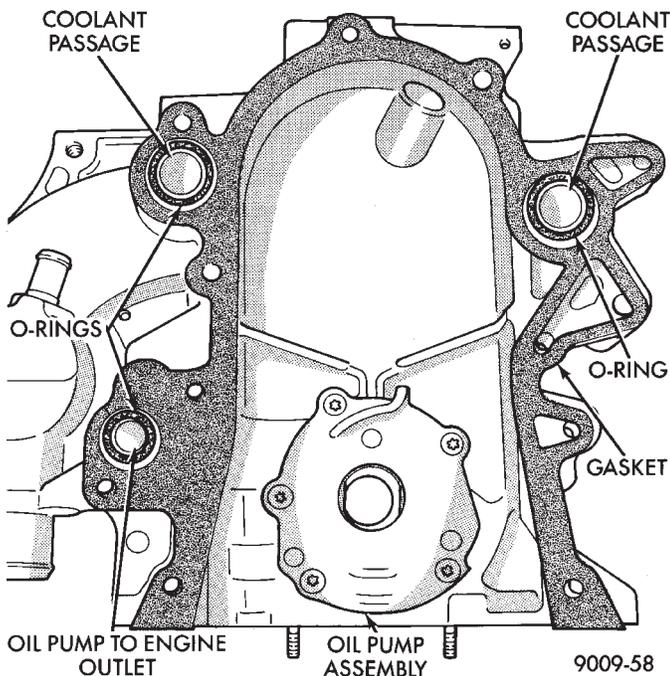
Timing Chain Case Cover Gaskets and O-Rings
